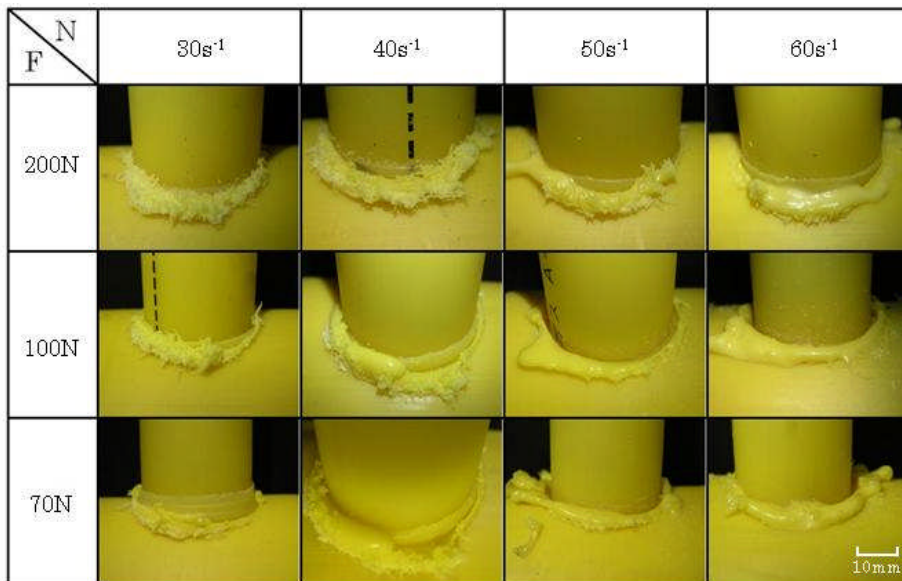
Appearance of branch pipe friction welded joint.
